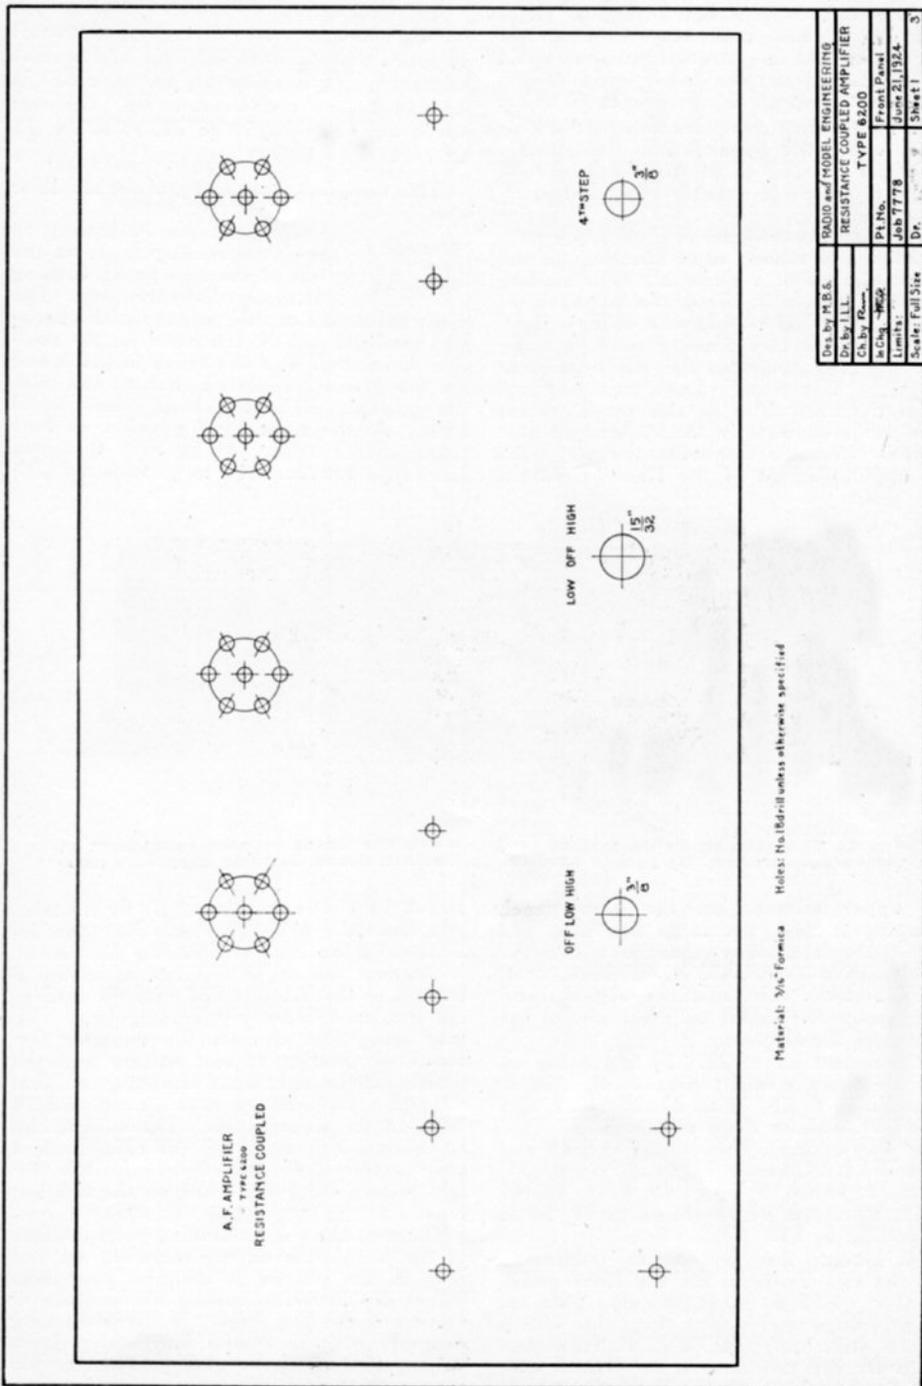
The front panel at one-half scale. Make all holes with a No. 18 drill except where other sizes are specified.
